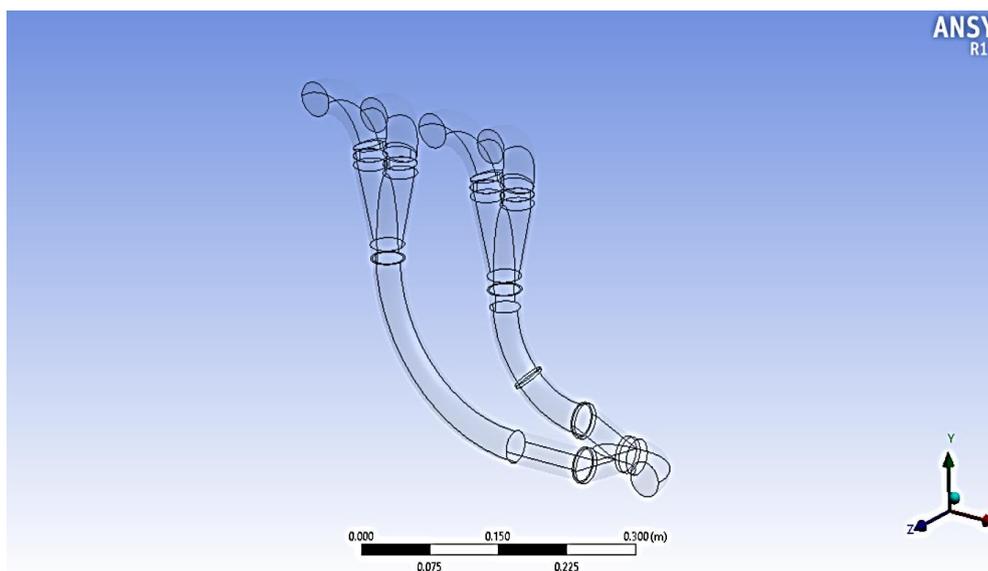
The view of inner geometry after all other solid parts are suppressed
